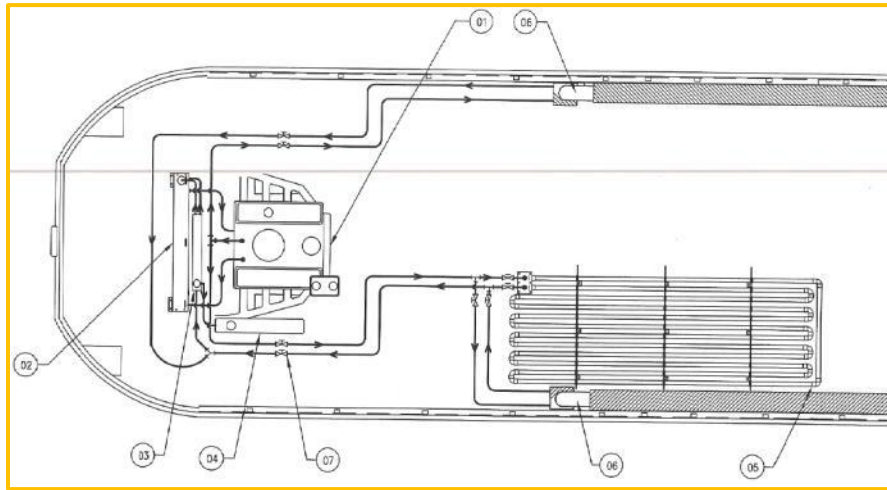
Stretch Duck cooling system schematic - plan view. Item descriptions: 01-Engine, 02-radiator, 03-surge tank, 04-overflow tank, 05-keel cooler, 06-heater, 07-ball valve. Drawing by RTDI.
